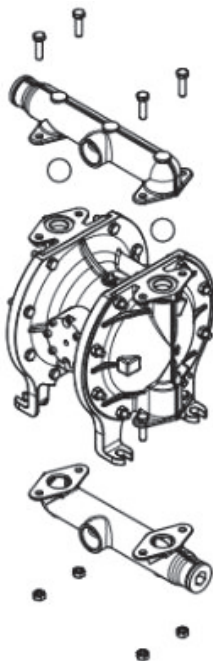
Disassembly of the manifold and valve balls in the discharge manifold
